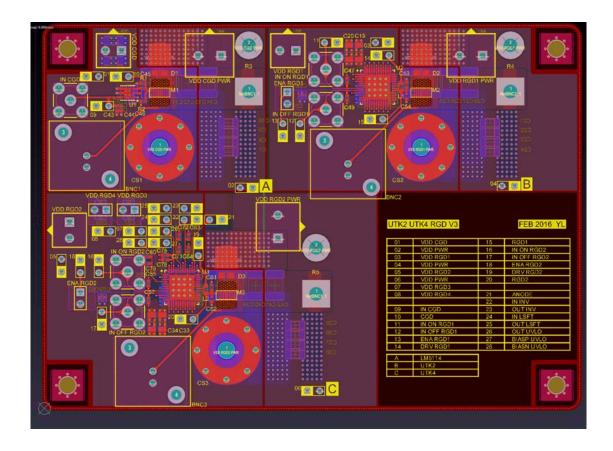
Layout of the testing PCB (4.56" \times 3.27").
